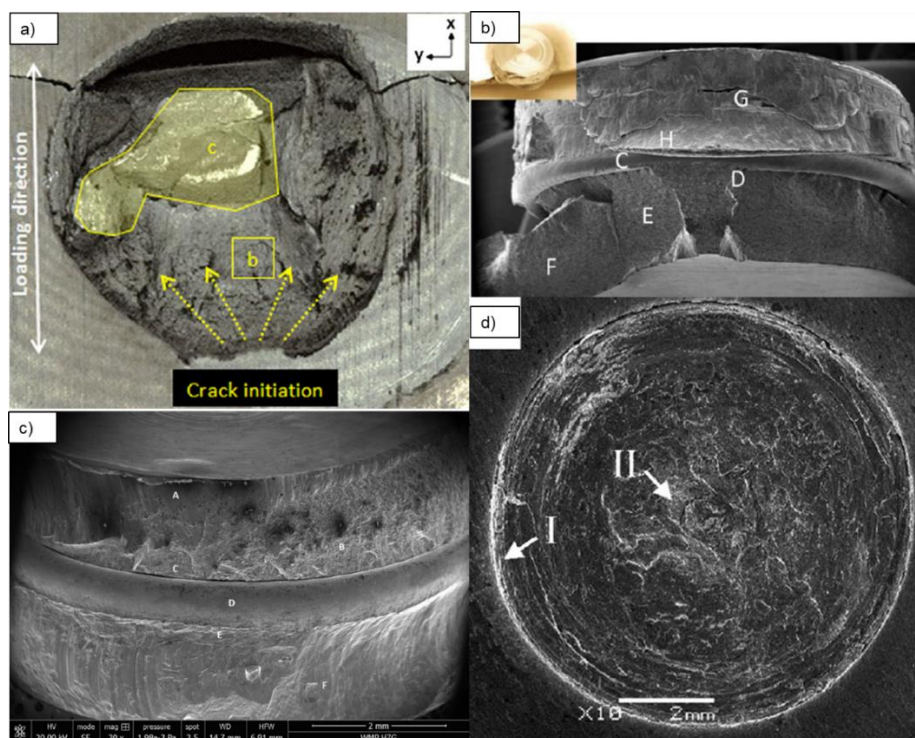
Fatigue fracture surfaces of specimens tested in low-cycle conditions for RFSSW welds of a) AA5754/Ti6Al4V [81], b) AA2024-T3 [35], c) AA7050-T76 [80] and d) ZEK 100 magnesium alloy [79].
